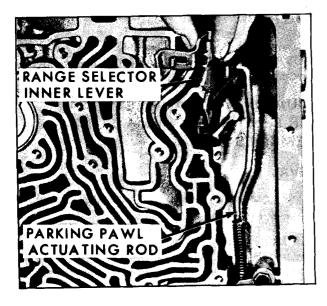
G-42 Removing Inner Lever and Actuating Rod
